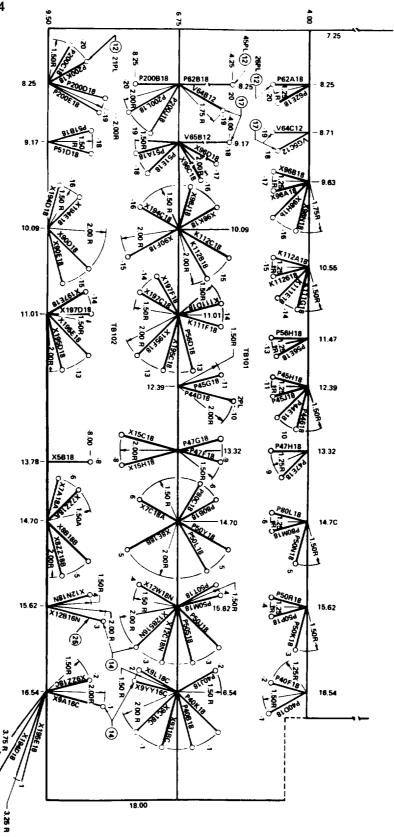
Special Relay Assembly Wiring Harness, Drawing No. 72-2239 (Sheet 4 of 4)
